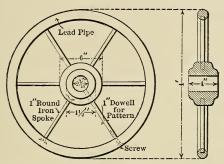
A Quickly Made Fly-wheel Pattern.
